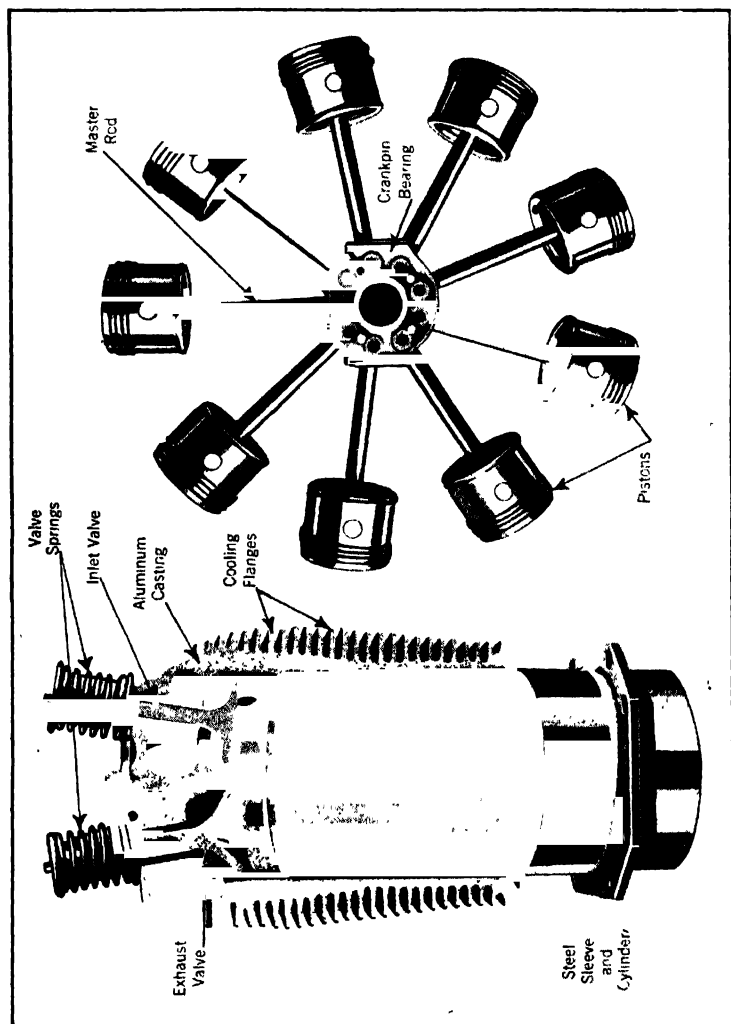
Sectional View of Wright J4A Cylinder at Left. View at Right Shows Master Rod Assembly with Pistons and Link Rods in Place.
